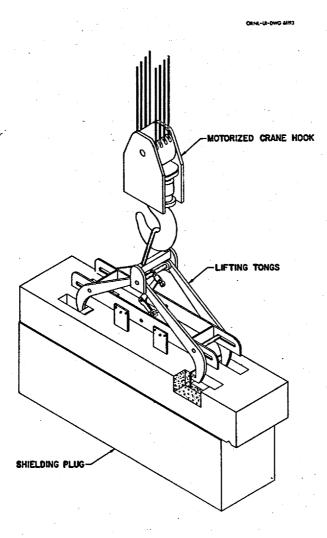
Remotely Operated Lifting Tongs for Shielding Plugs.
